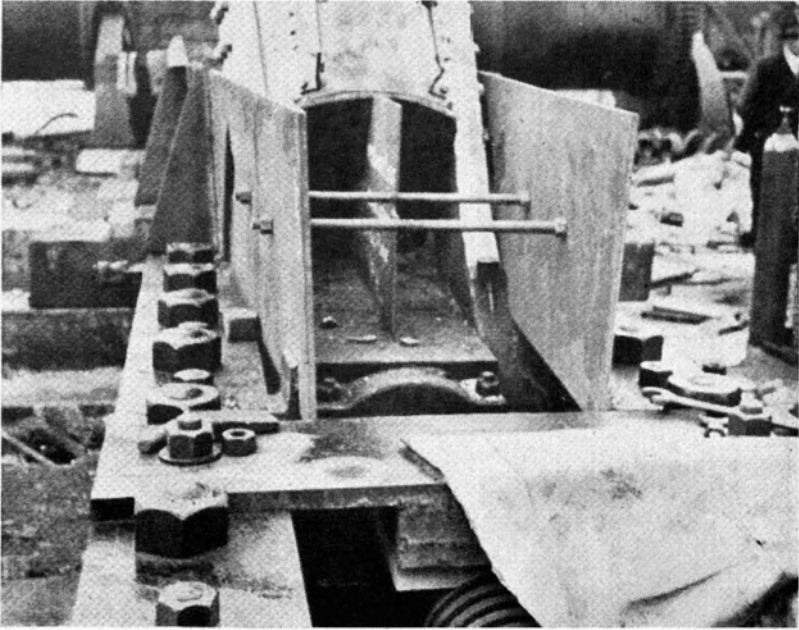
SIDE AND FLAME BAFFLE PLATES
